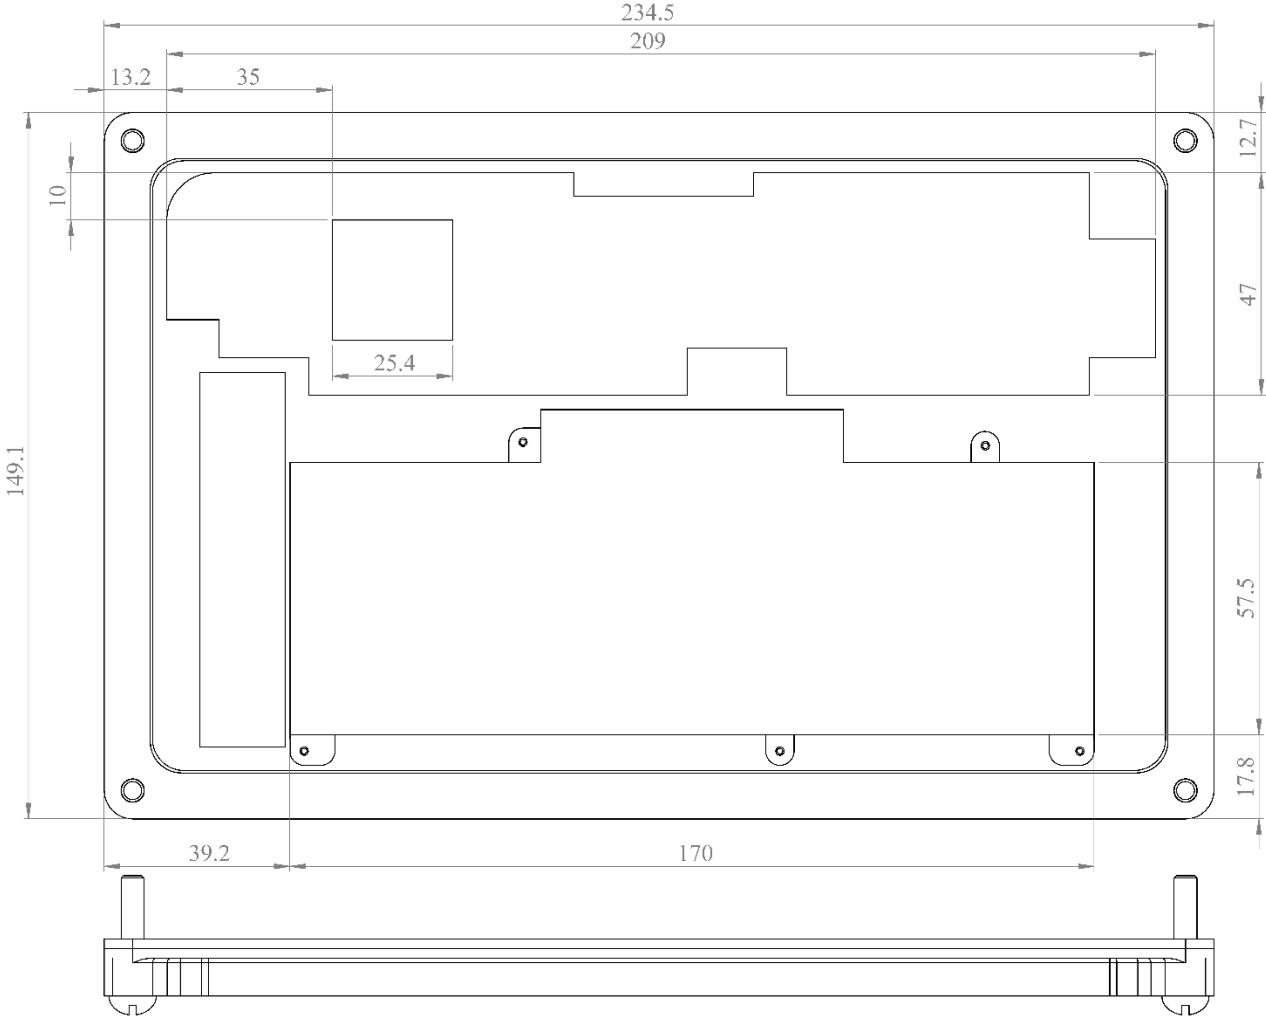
Dimensioned drawing of the experimental setup, all dimensions are in mm
